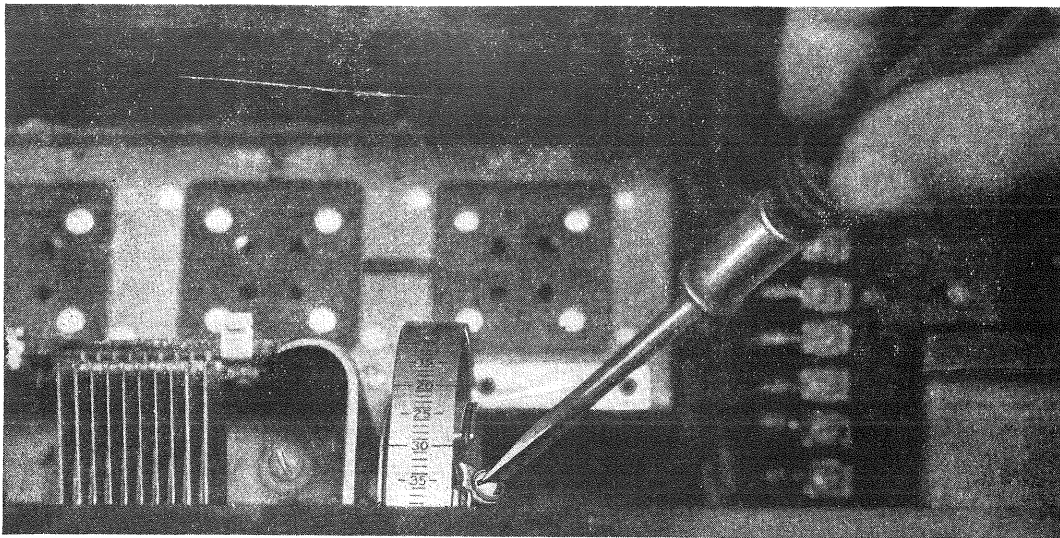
Turning cable adjusting screw to take up slack in tuning drum cable.
